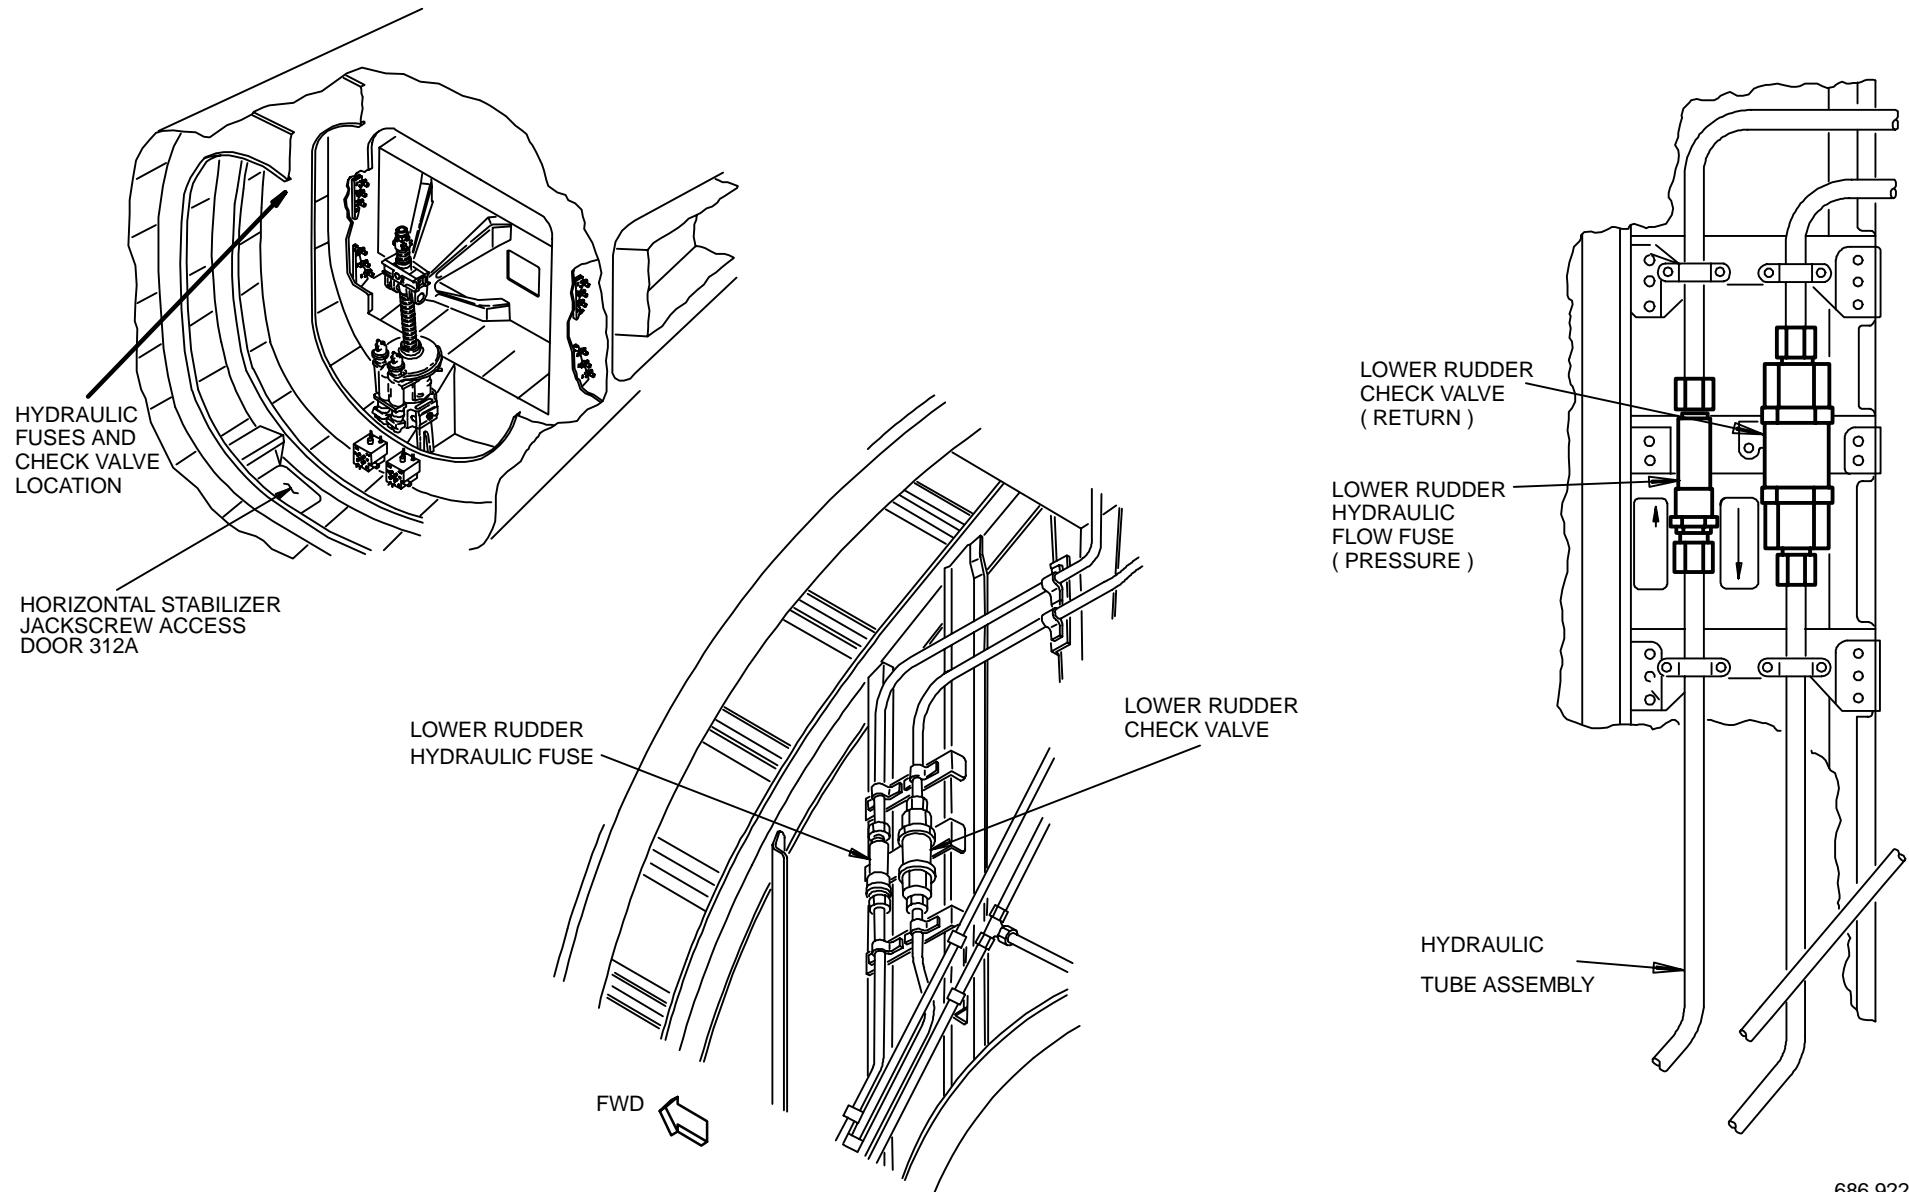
LOWER RUDDER HYDRAULIC FUSES
